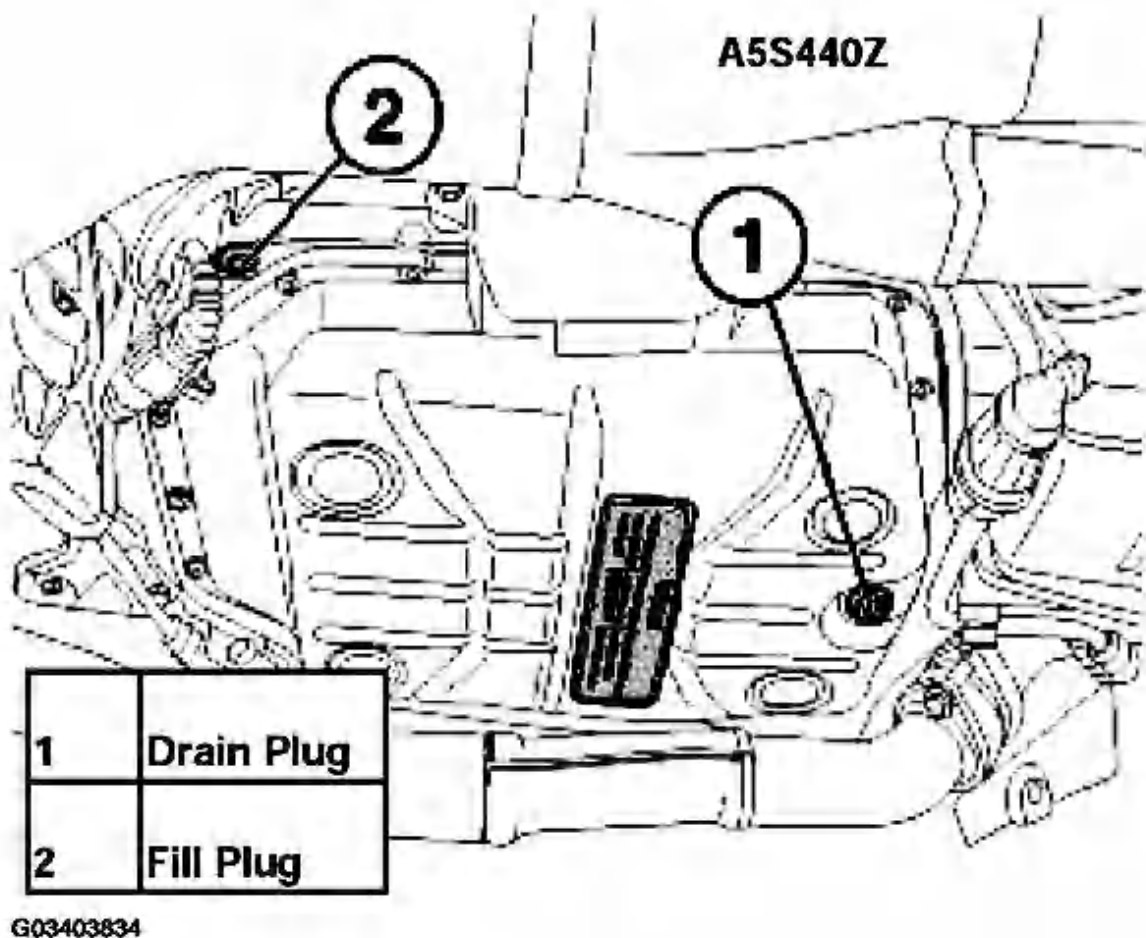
Identifying Transmissions Drain Plug And Fill Plug
